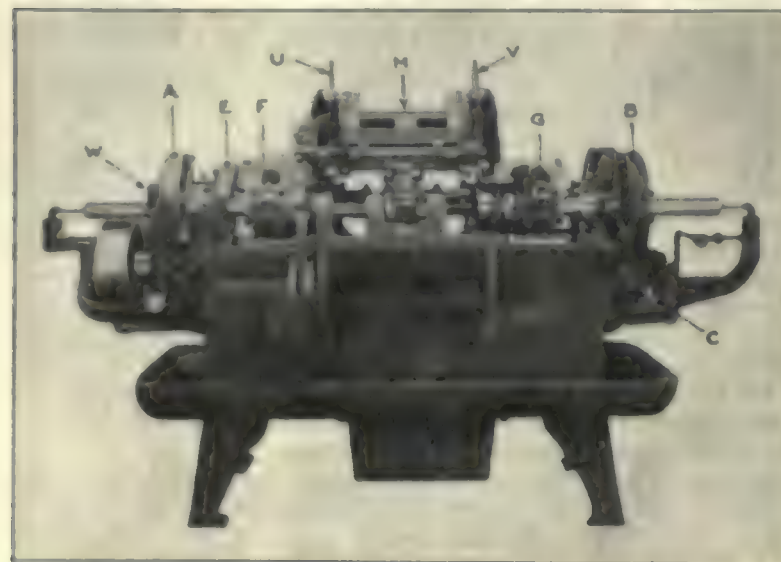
CLEVELAND DOUBLE-ENDED THREADING MACHINE
